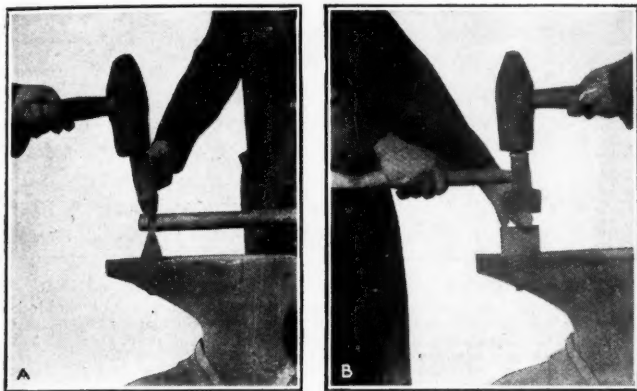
TOOLS USED FOR MAKING ROUNDED GROOVES. A shows the top and bottom fuller, the latter fitting into the hardie hole. B shows another view of these tools. The top fuller is sometimes used alone for making scarfs for welds, for forming grooves, smoothing fillets and forming shoulders on only one side of the forging.
